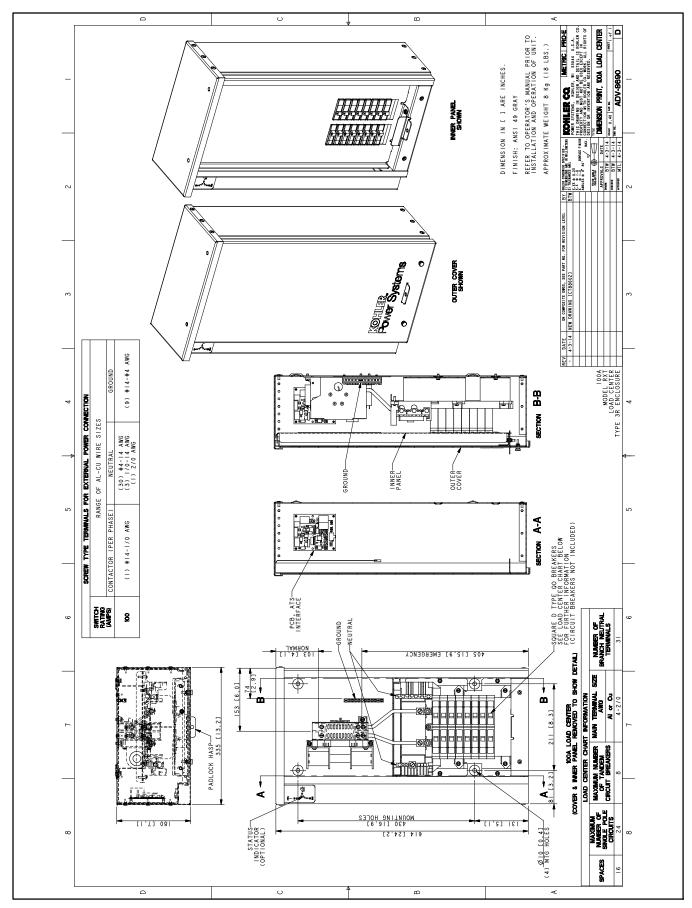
Enclosure Dimensions, 100 Amp Single-Phase with Load Center, ADV-8690
